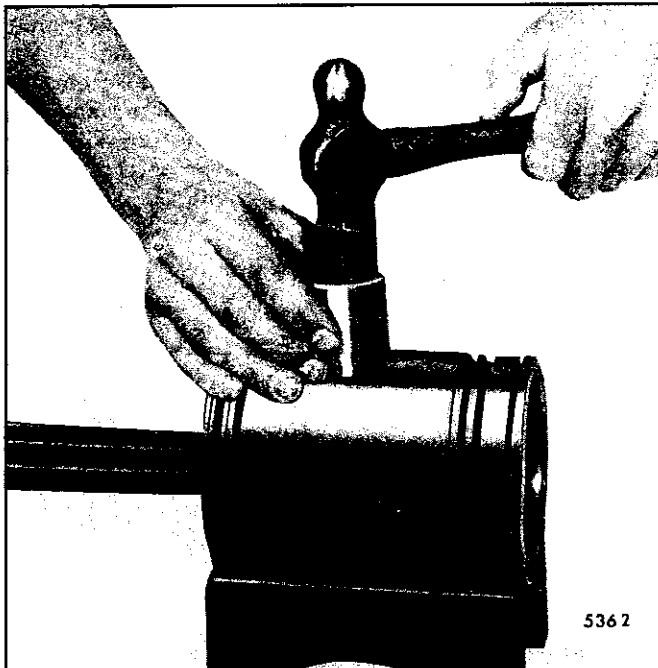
Installing Piston Pin Retainer Using Tool J 35572
